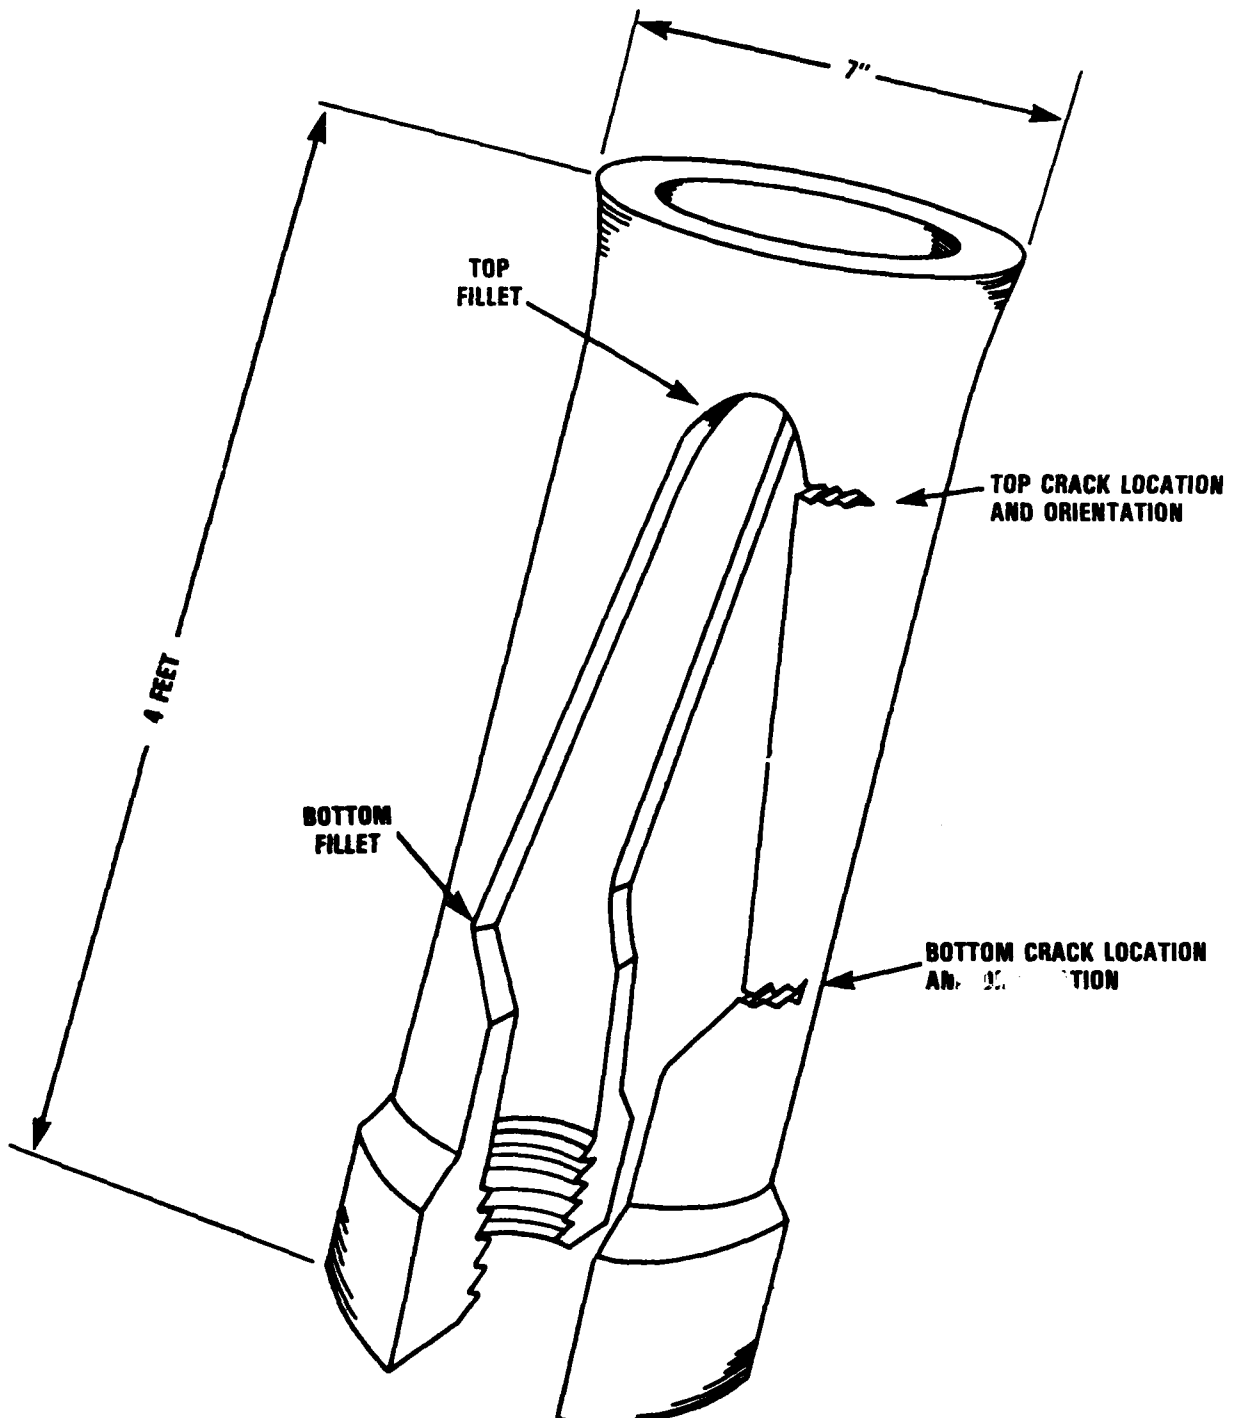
TOP AND BOTTOM FILLET CRACK LOCATIONS IN THE GRAPHITE HEATER
